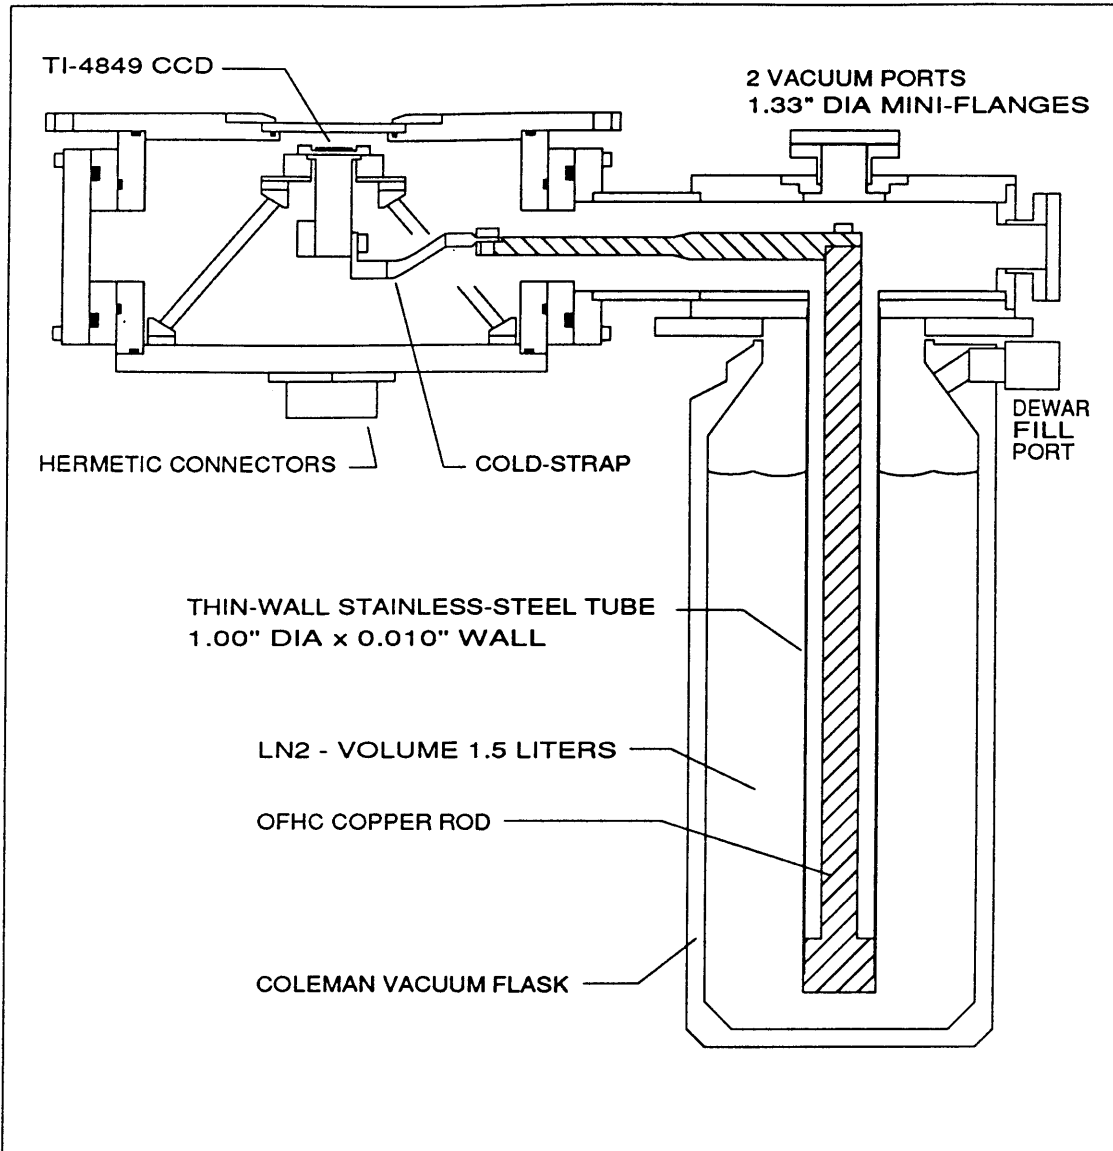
Assembly drawing of the side-mount dewar attached to the TI-4849 CCD camera head
